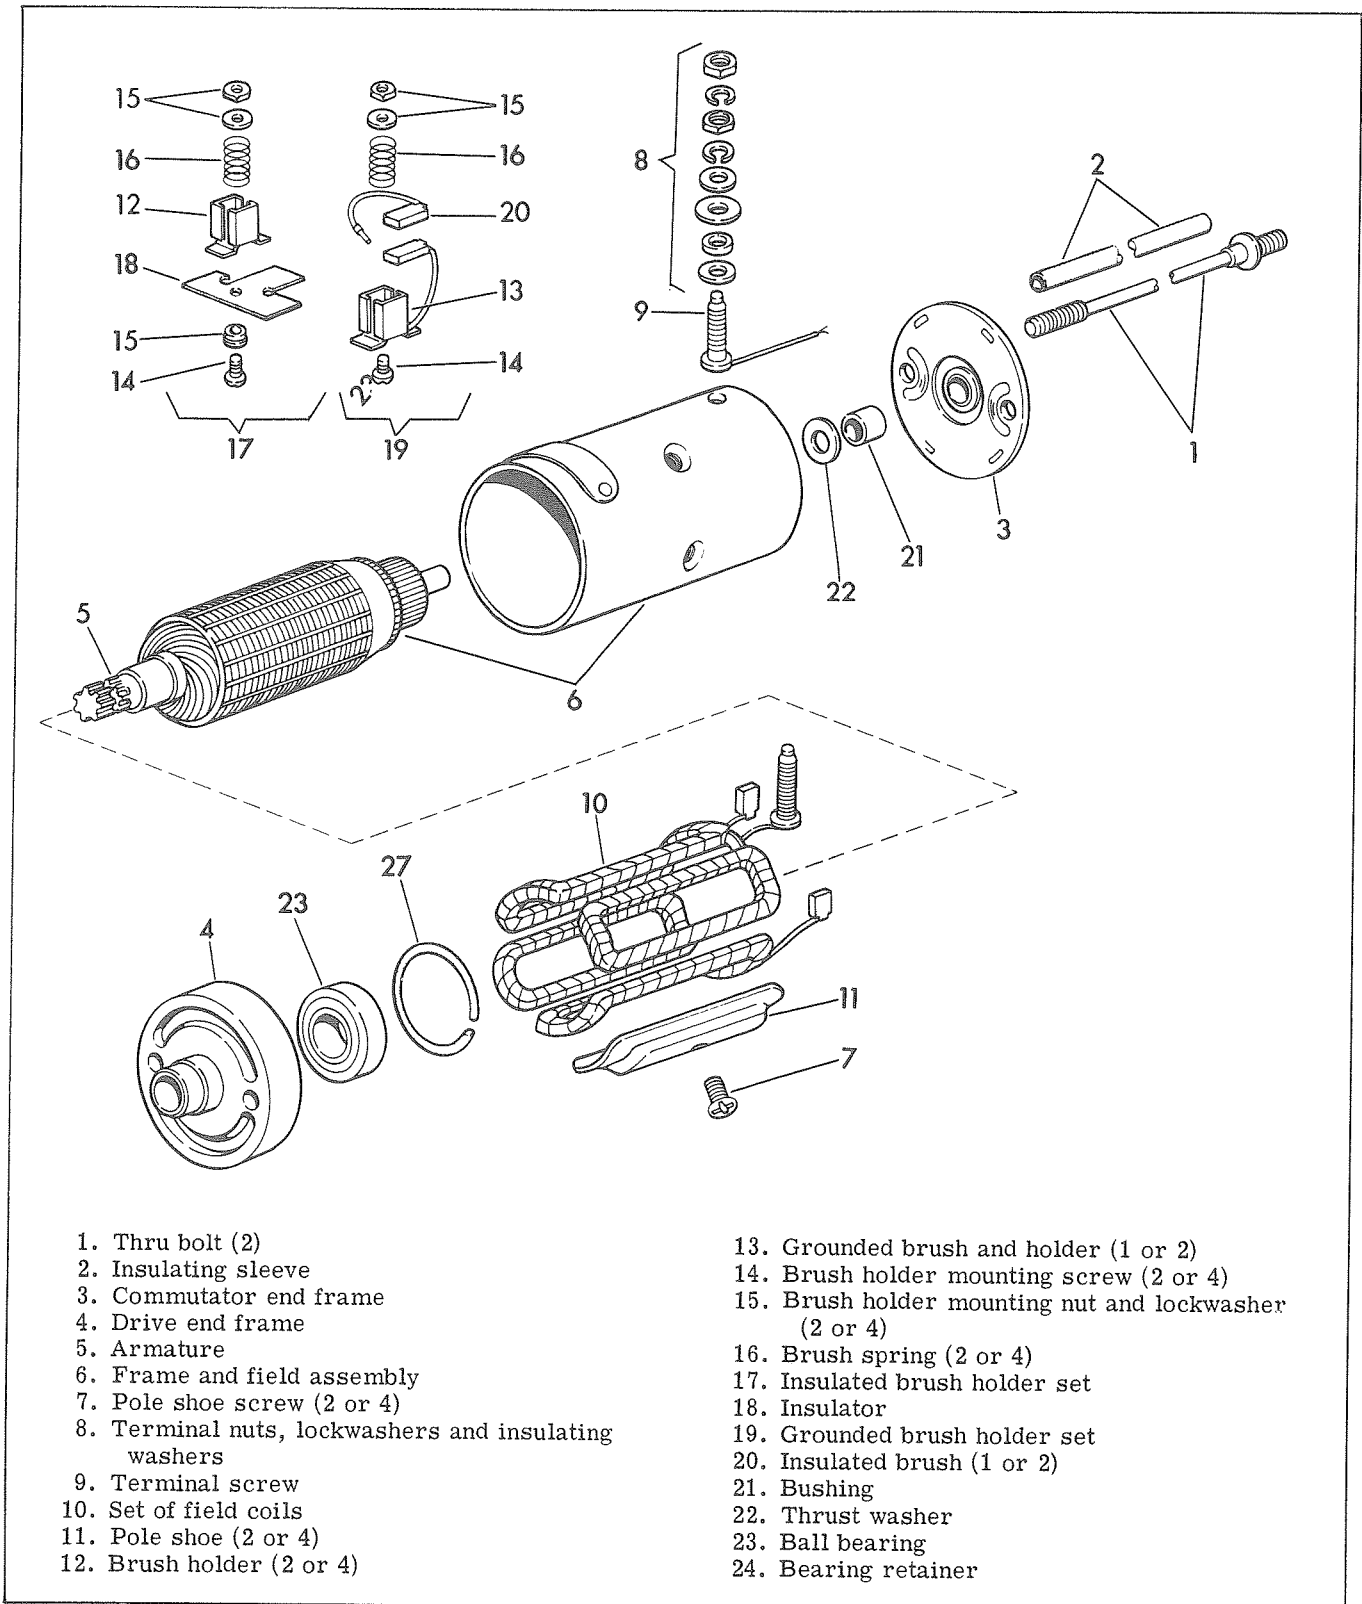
L-9. Delco Remy 4 Pole Starter Motor - Exploded View
